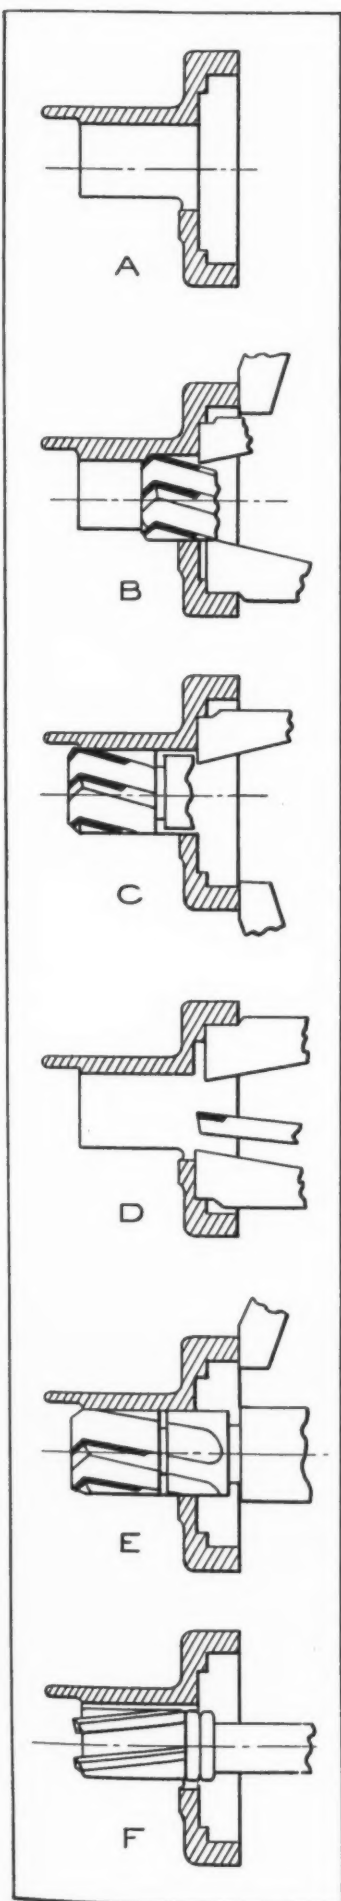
(Left) Diagrammatic Views of the Tools Provided on the Automatic Illustrated in Fig. 5, which Finishes Malleable-iron Tractor Castings
